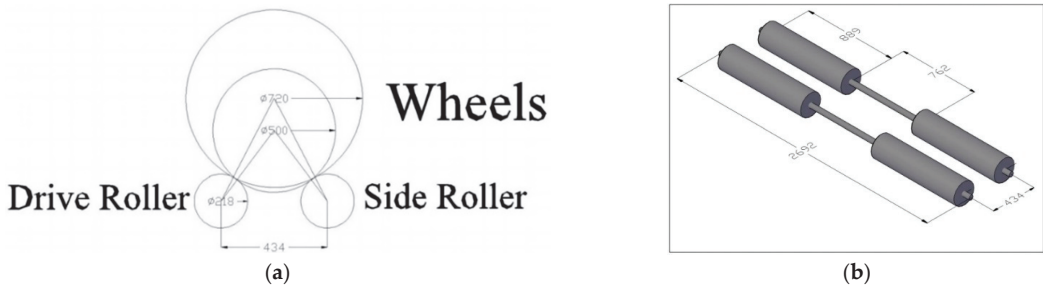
(a) Position of front and rear rollers with maximum and minimum angles of tires. (b) Isometric view of rollers and shaft with designed dimensions.
